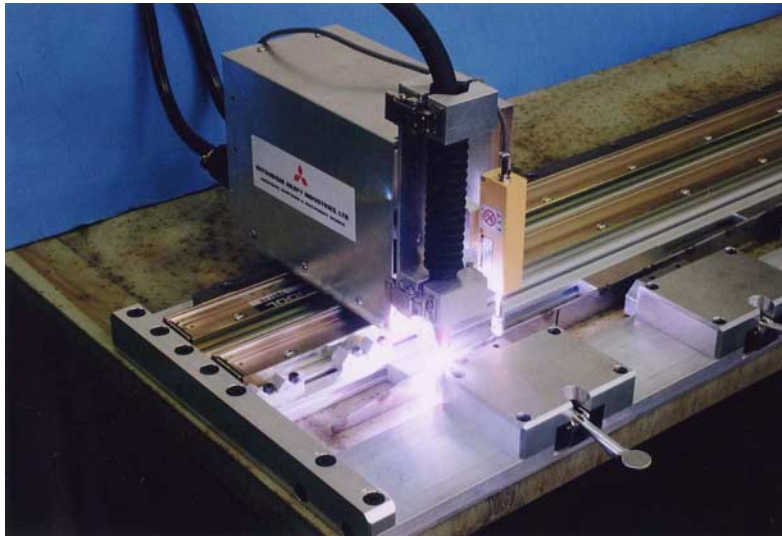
Appearance of automatic TIG welding using the newly developed robot
